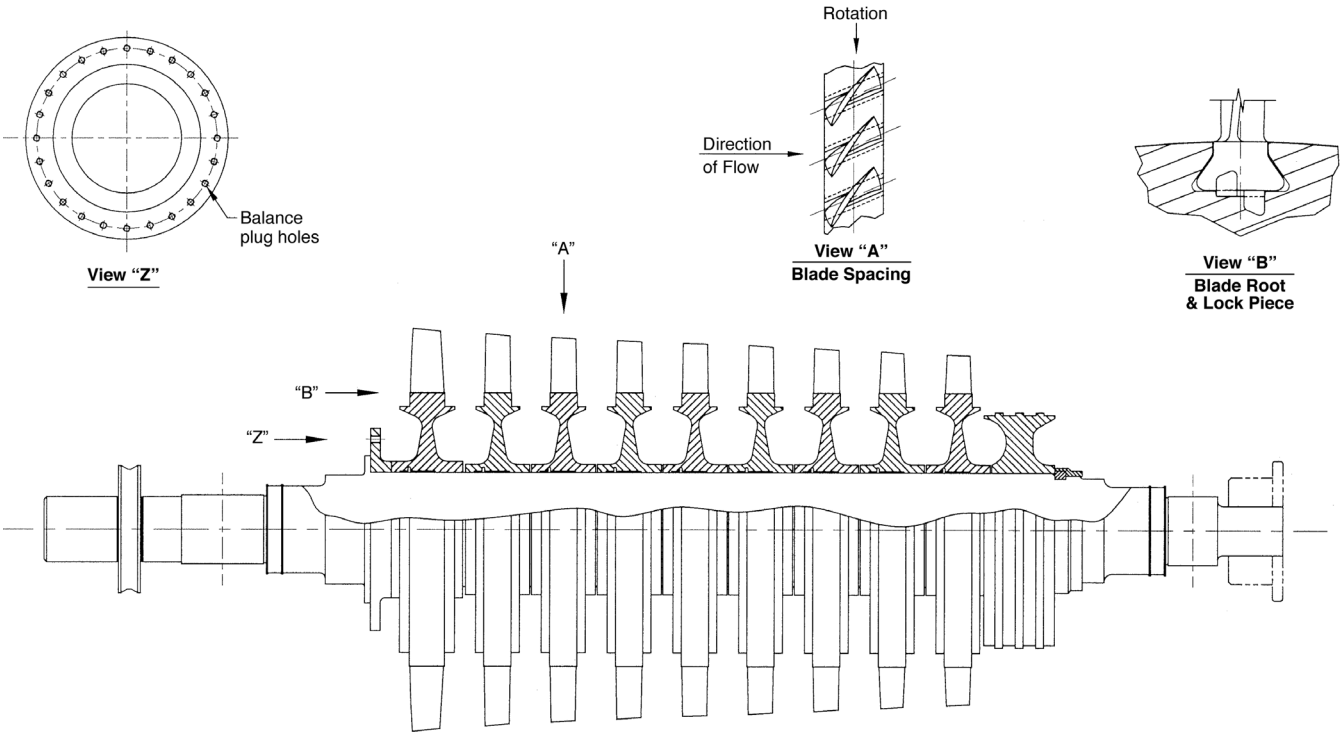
Axial Compressor Rotor Construction: Disk-on-shaft Shrink Fit
